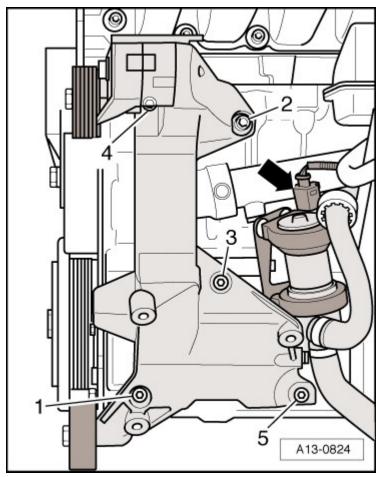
Accessory Assembly Bracket Bolts & After-Run Coolant Pump V51 Electrical Harness
